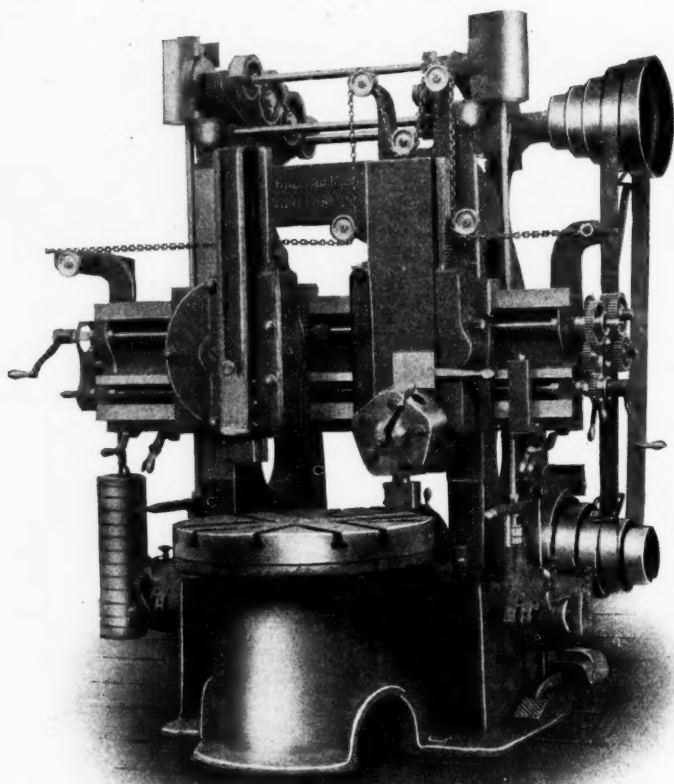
Bullard 42-inch Boring and Turning Mill.
